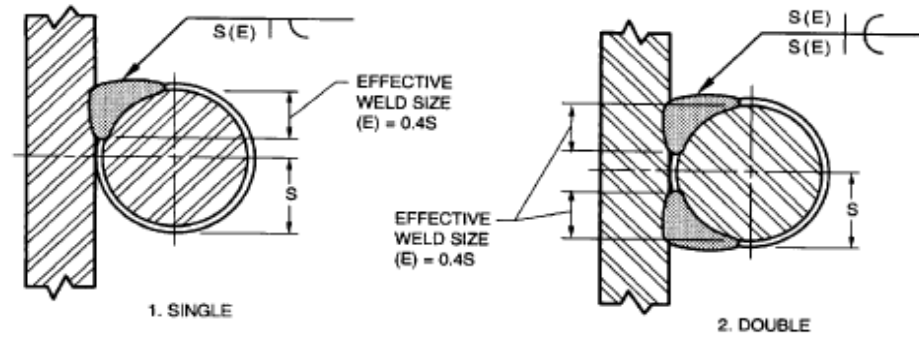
Flare bevel groove weld (from AWS D1.4/D1.4M, 1998 and 2011)
